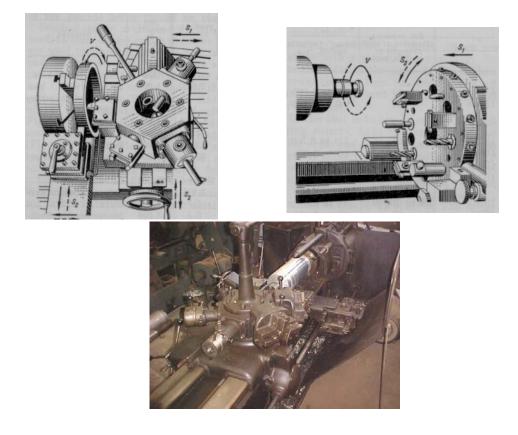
Mounting of cutting tools on the turret in semiautomatic lathe.
